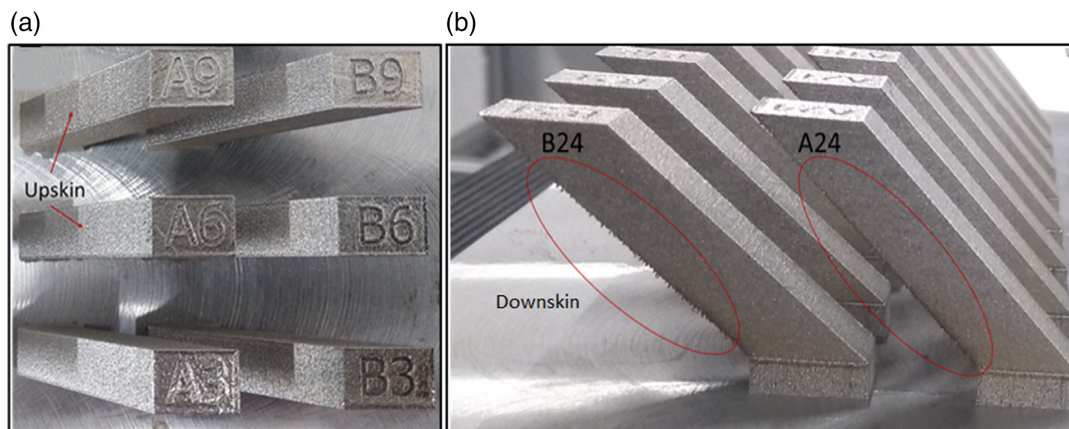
a) Upskin and b) downskin surfaces of the printed samples.
